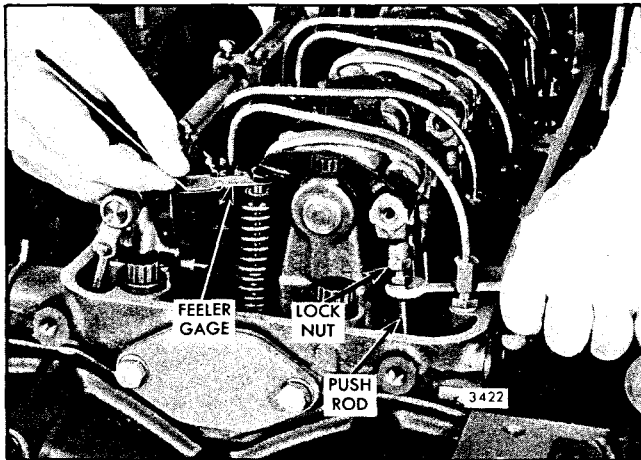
Adjusting Valve Clearance (Two-Valve Cylinder Head)
